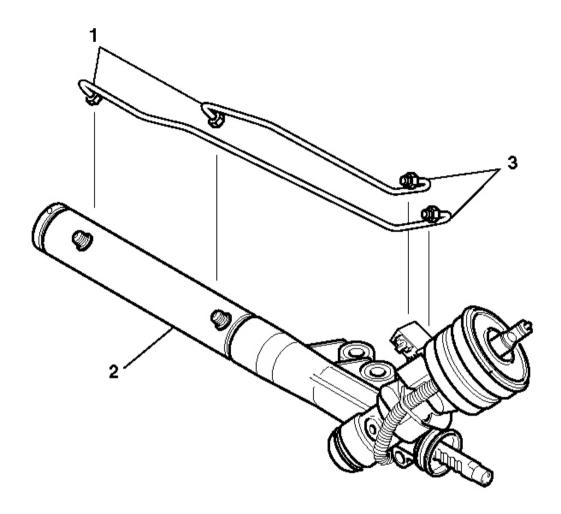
Cylinder Line Fittings & Gear Assembly Courtesy of GENERAL MOTORS CORP.
